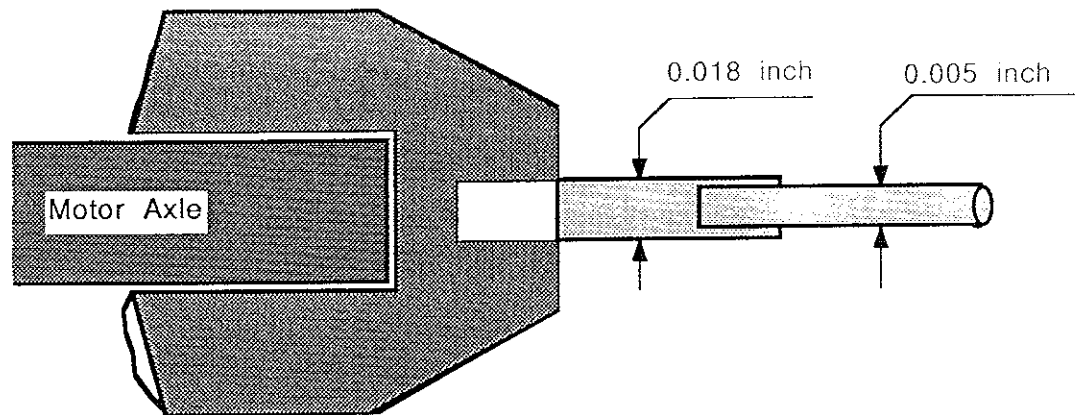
Schematic drawing of a home made driller used to drill small hole on the third sound cell.
